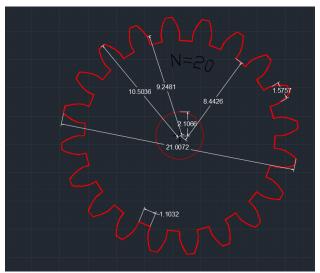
20 Toothed Gear AutoCAD Drawing, Dimensions in mm
